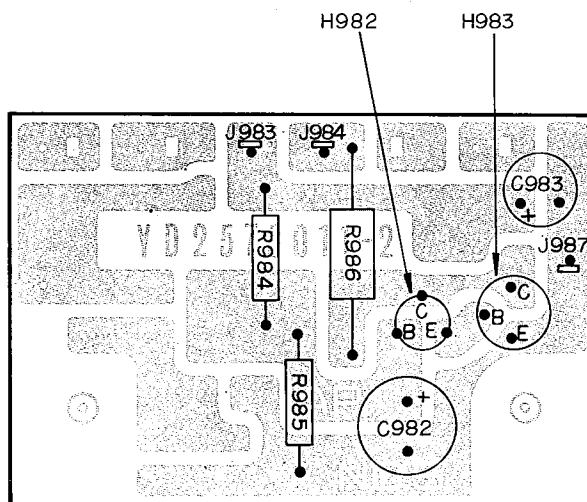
Speaker Protector Circuit Assembly P980 Component Locations
